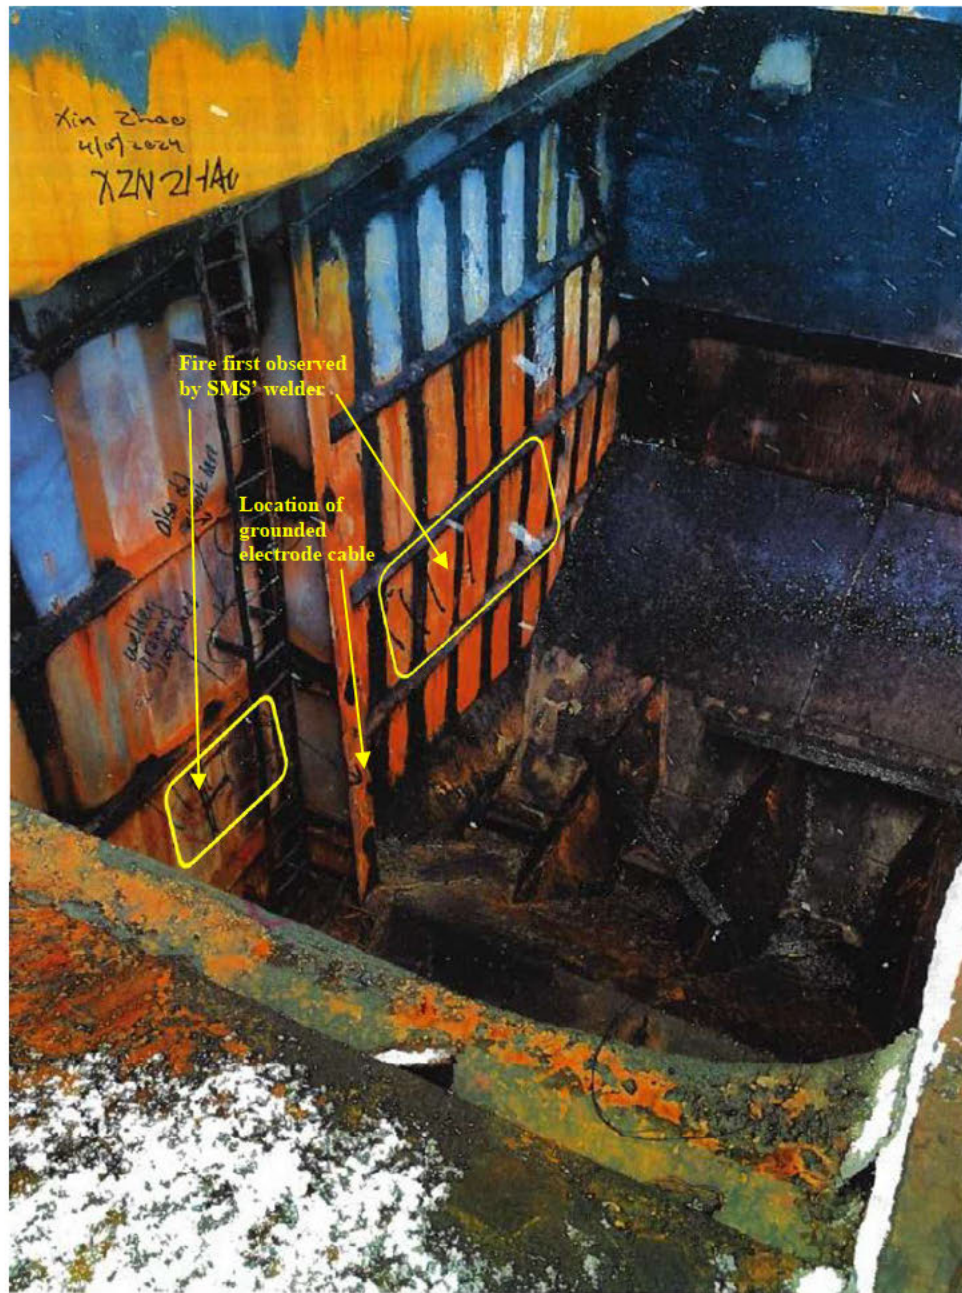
Location where SMS' welder discovered the initial flames in *Cuyahoga's* Cargo Hold No. 2.
